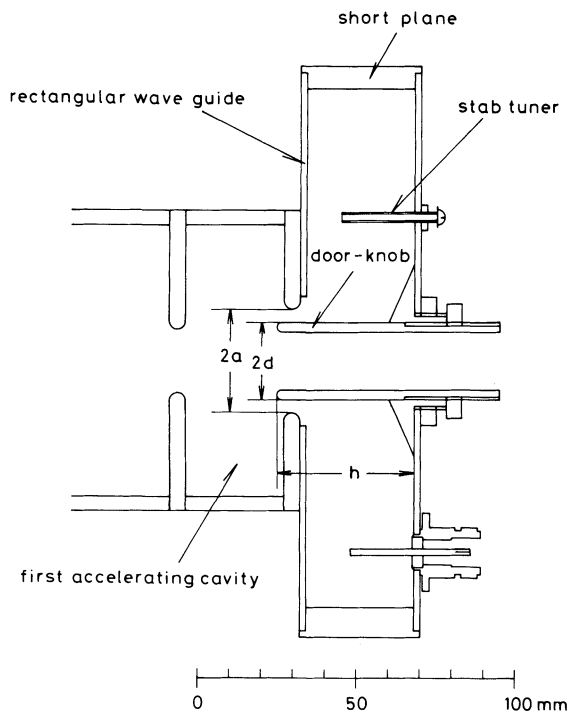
Cross-sectional view of the "door-knob" coupler.
